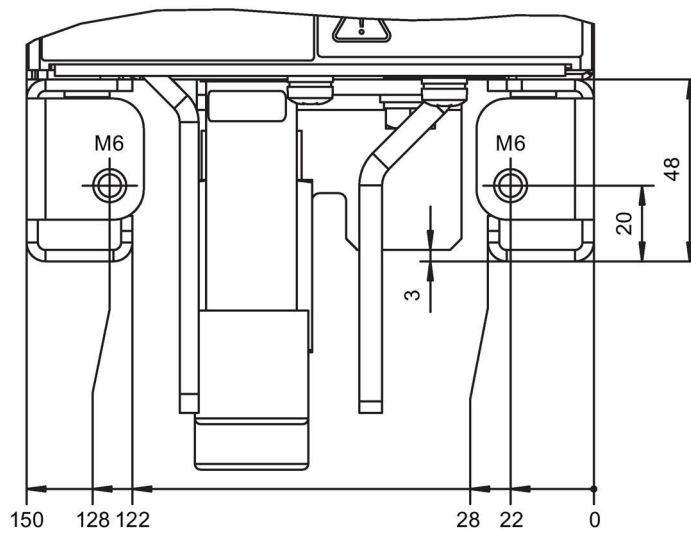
Rail profile, Motor Module, frame size GXL (dimensions in mm)
